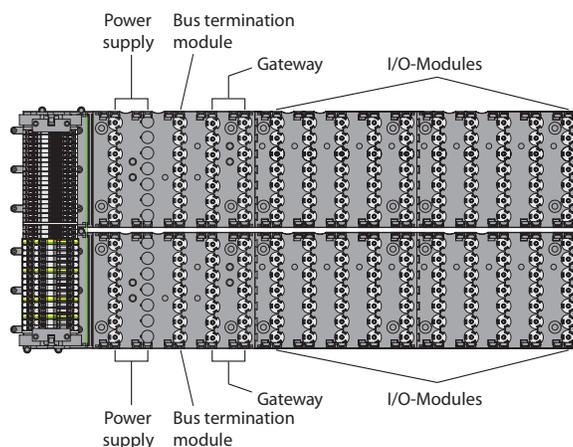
1718-A20 Ex I/O 10 Slot Chassis - Assembly
